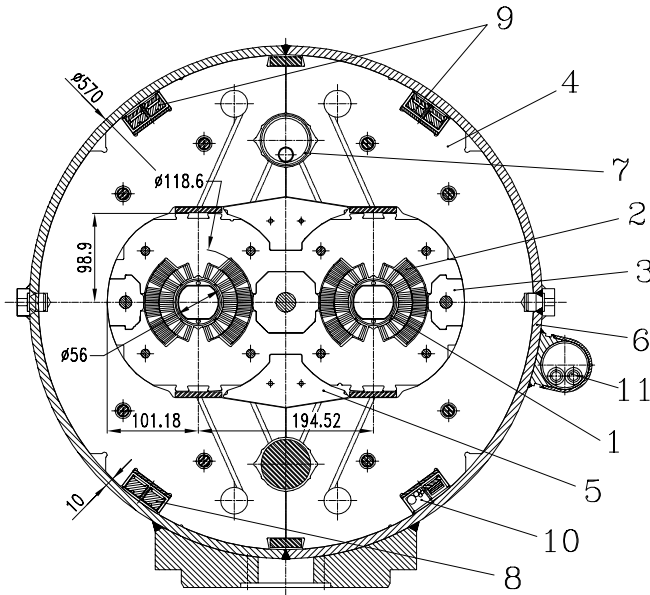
Series-manufacture cross-section of LHC dipoles. 1-beam tube; 2-SC coils; 3-austenitic steel collars; 4-iron yoke; 5-iron yoke “insert”; 6-shrinking cylinder / He II vessel; 7-heat exchanger tube; 8-dipole bus-bars; 9-arc quadrupole and “spool-pieces” bus-bars; 10-wires for magnet protection and instrumentation; 11-bus-bars for auxiliary magnets in the LHC arc short straight sections.
